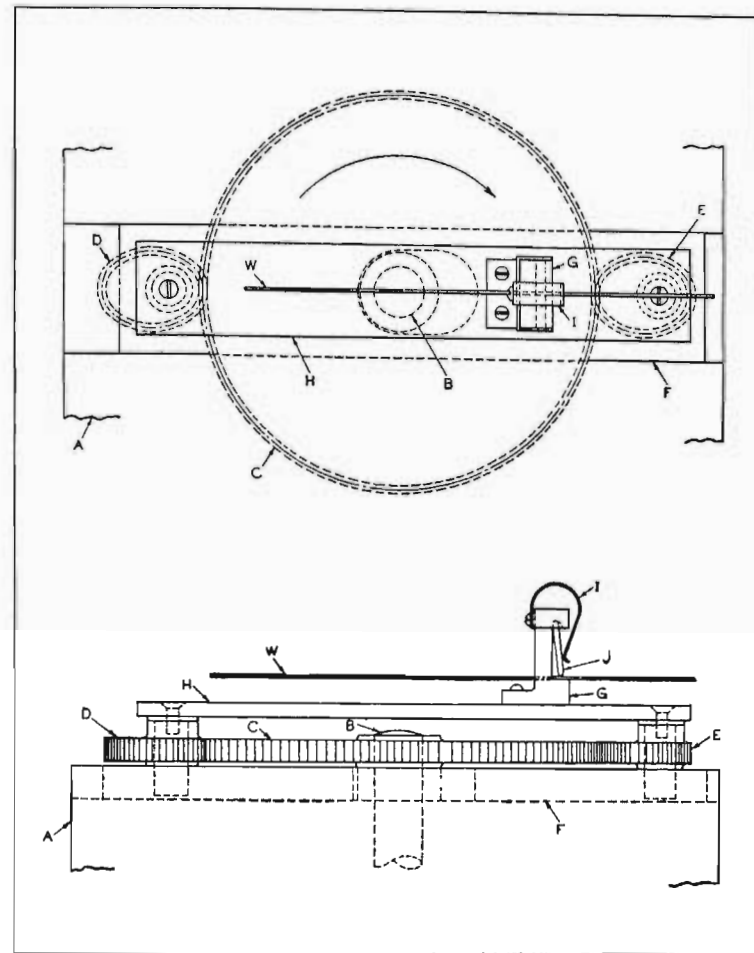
(Top) Wire Feeding Mechanism Designed for Rapid Short Stroke Motion. (Bottom) End View of Mechanism in which Slide *F* is at End of Feeding Movement to Right.
